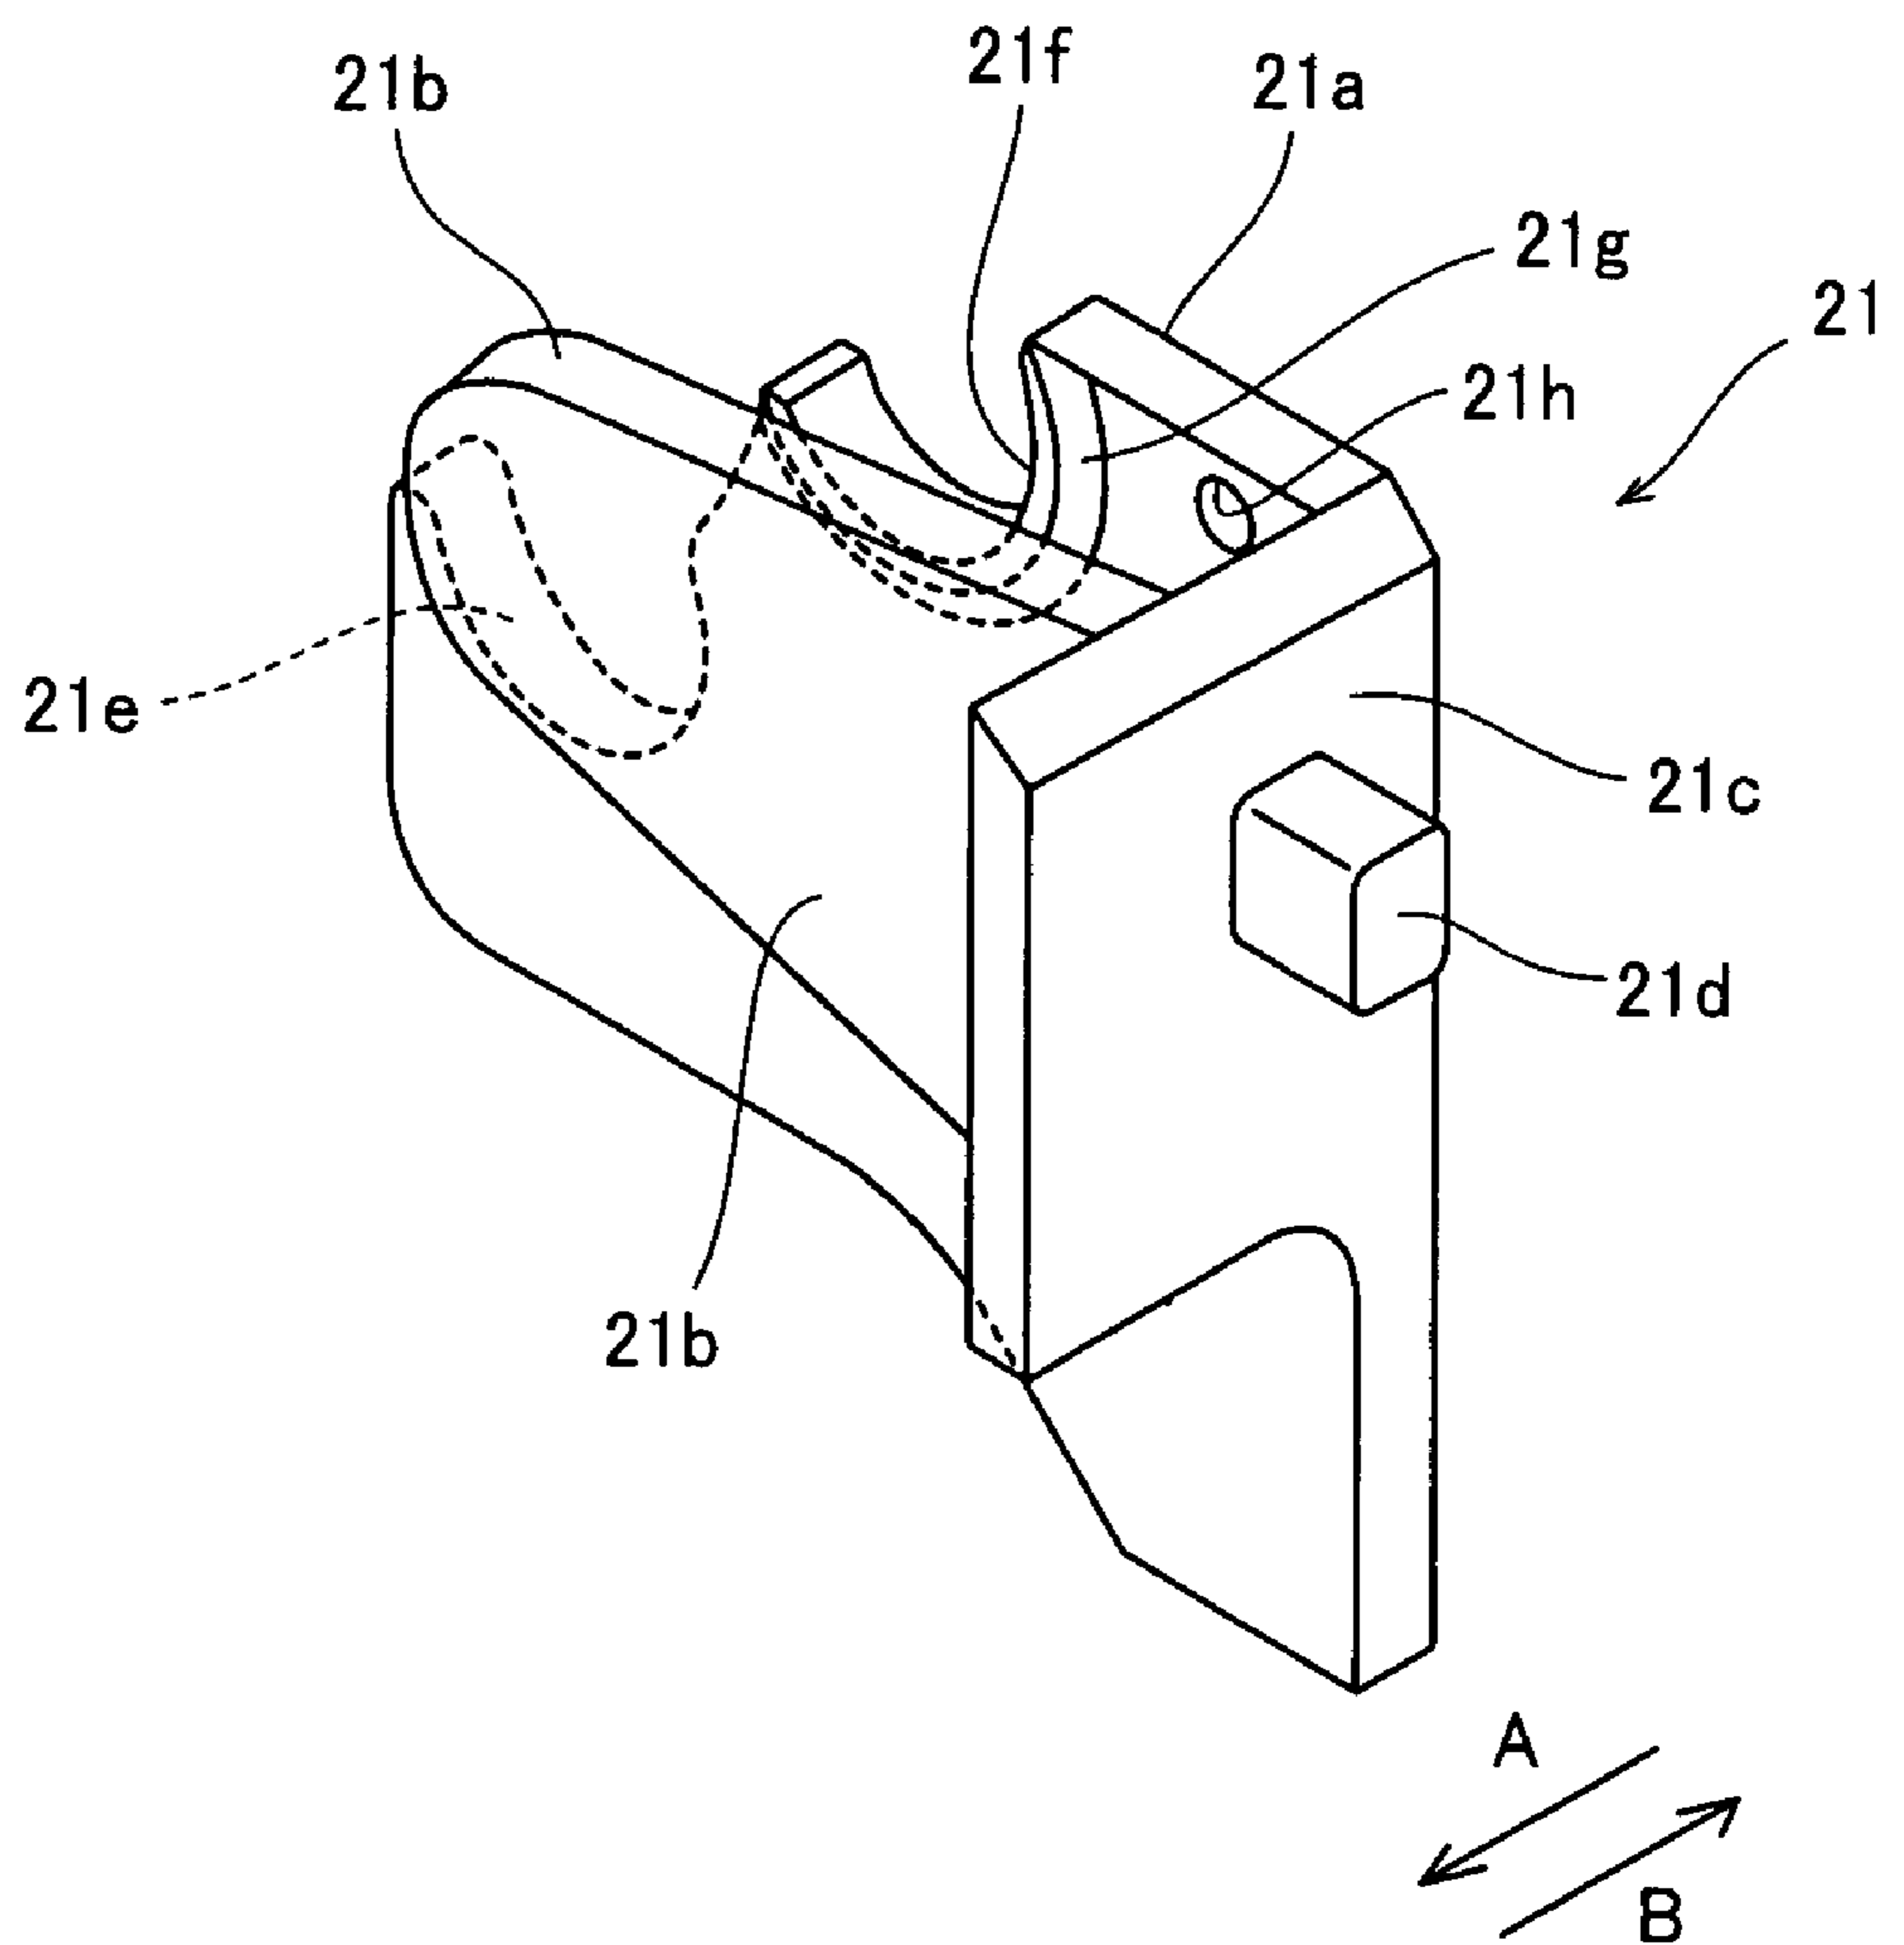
IMAGE GENERATING APPARATUS HAVING AXIALLY MOVABLE ROLLER GEAR
